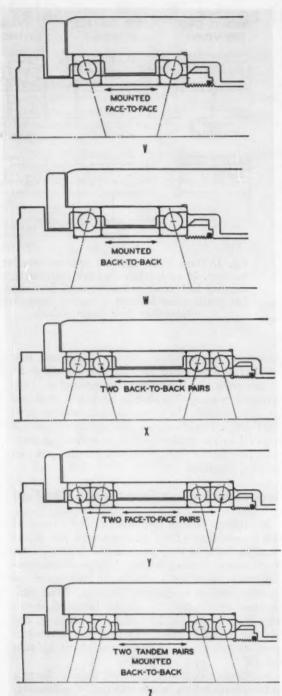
To prevent increases in preload due to thermal expansion, back-to-back mountings are preferred for bearings on machine tool spindles. When two pairs of bearings are used, each pair should be mounted in tandem but the combination arranged back-to-back (View Z).
